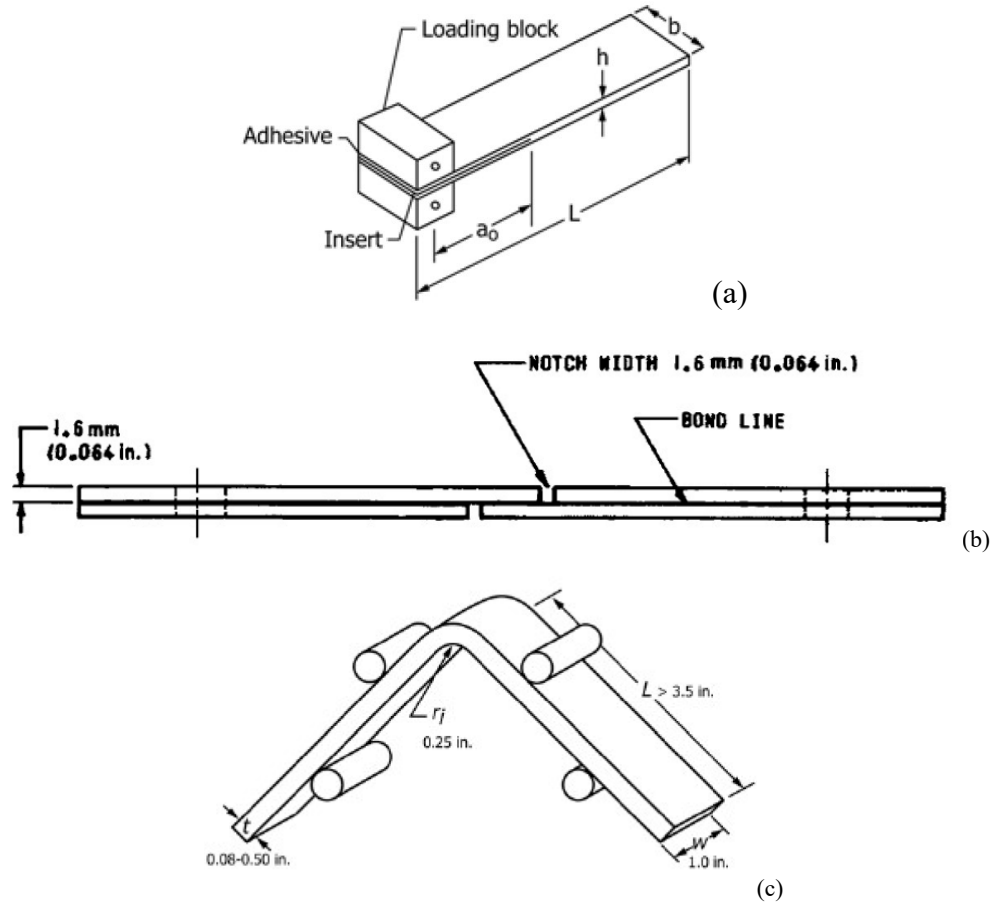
Specimen drawings for the three mechanical tests used to measure baseline properties: (a) DCB test, (b) SLS test, and (c) CB test.
